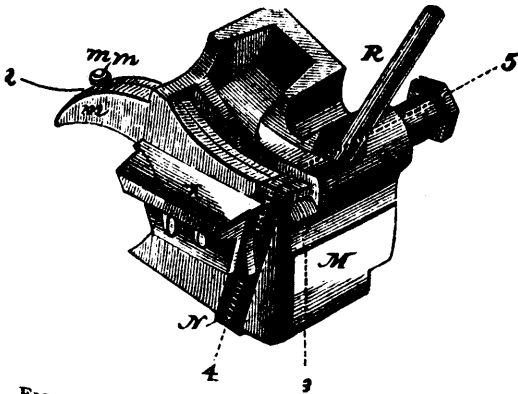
AUTOMATIC SOLDERING MACHINE.
